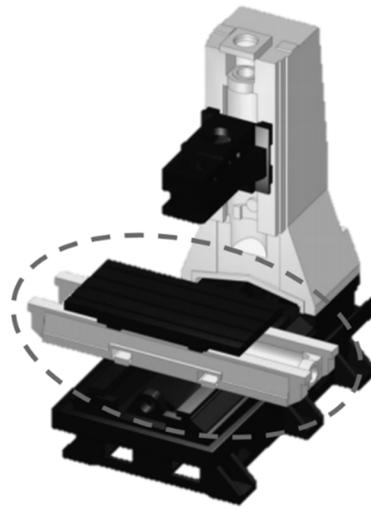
Machine tool carrying system with marked analyzed subsystem of saddle-table
